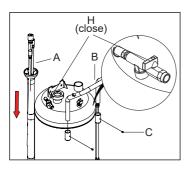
Assemble the tube, oil collecting bowl, filtrating plank and extension funnel.
